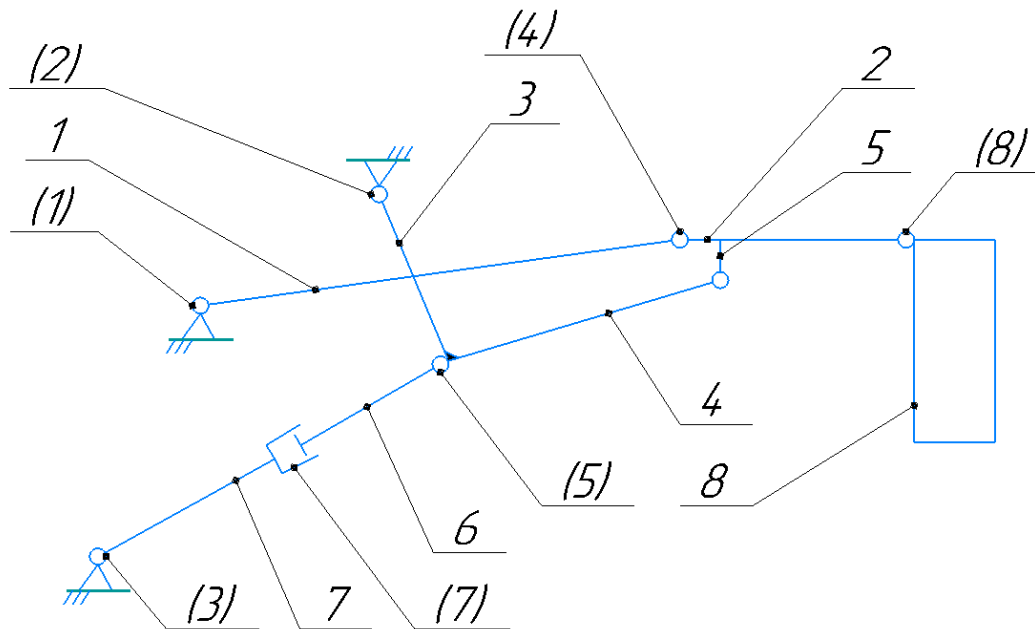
Kinematic scheme of “2-Joint” mechanism.
